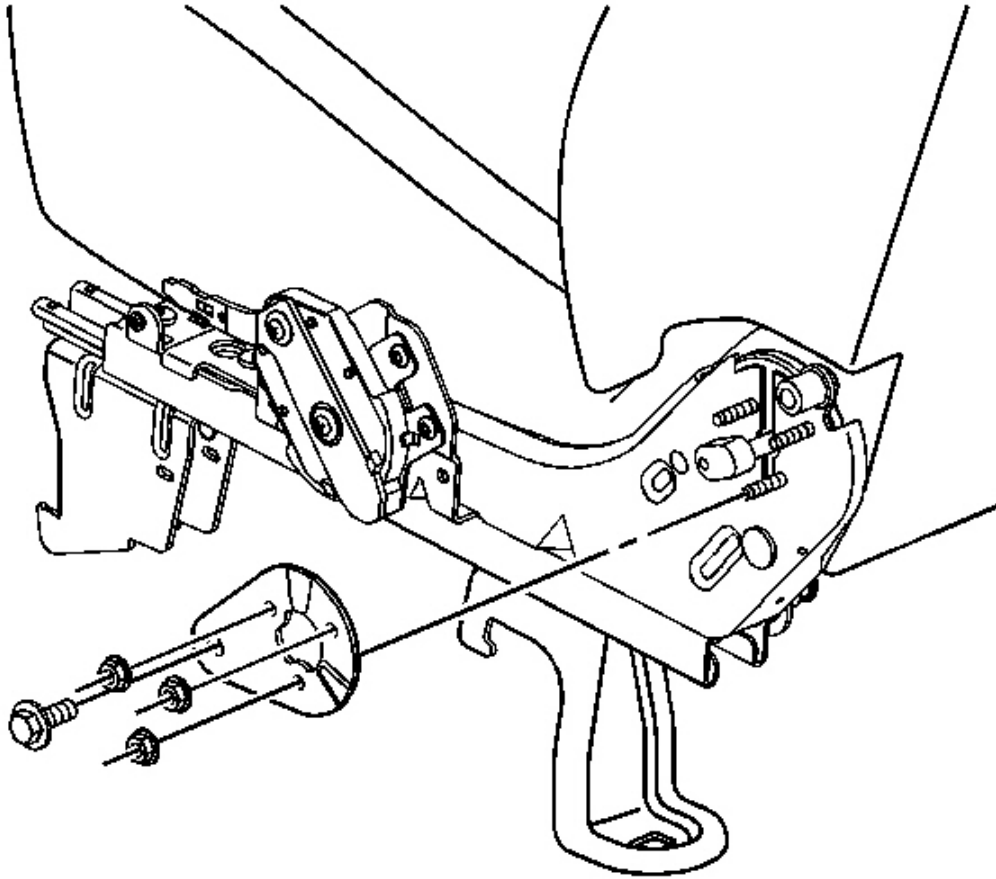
Removing/Installing Nuts Outboard Seat Back Frame
